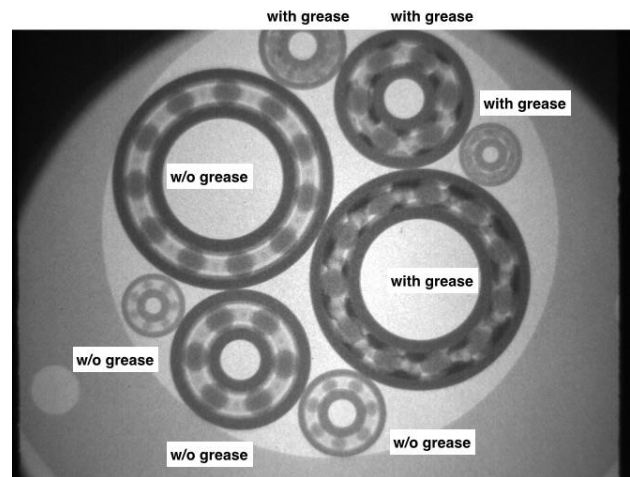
Neutron radiography image of the bearings. Half of these bearings are removed the grease.
